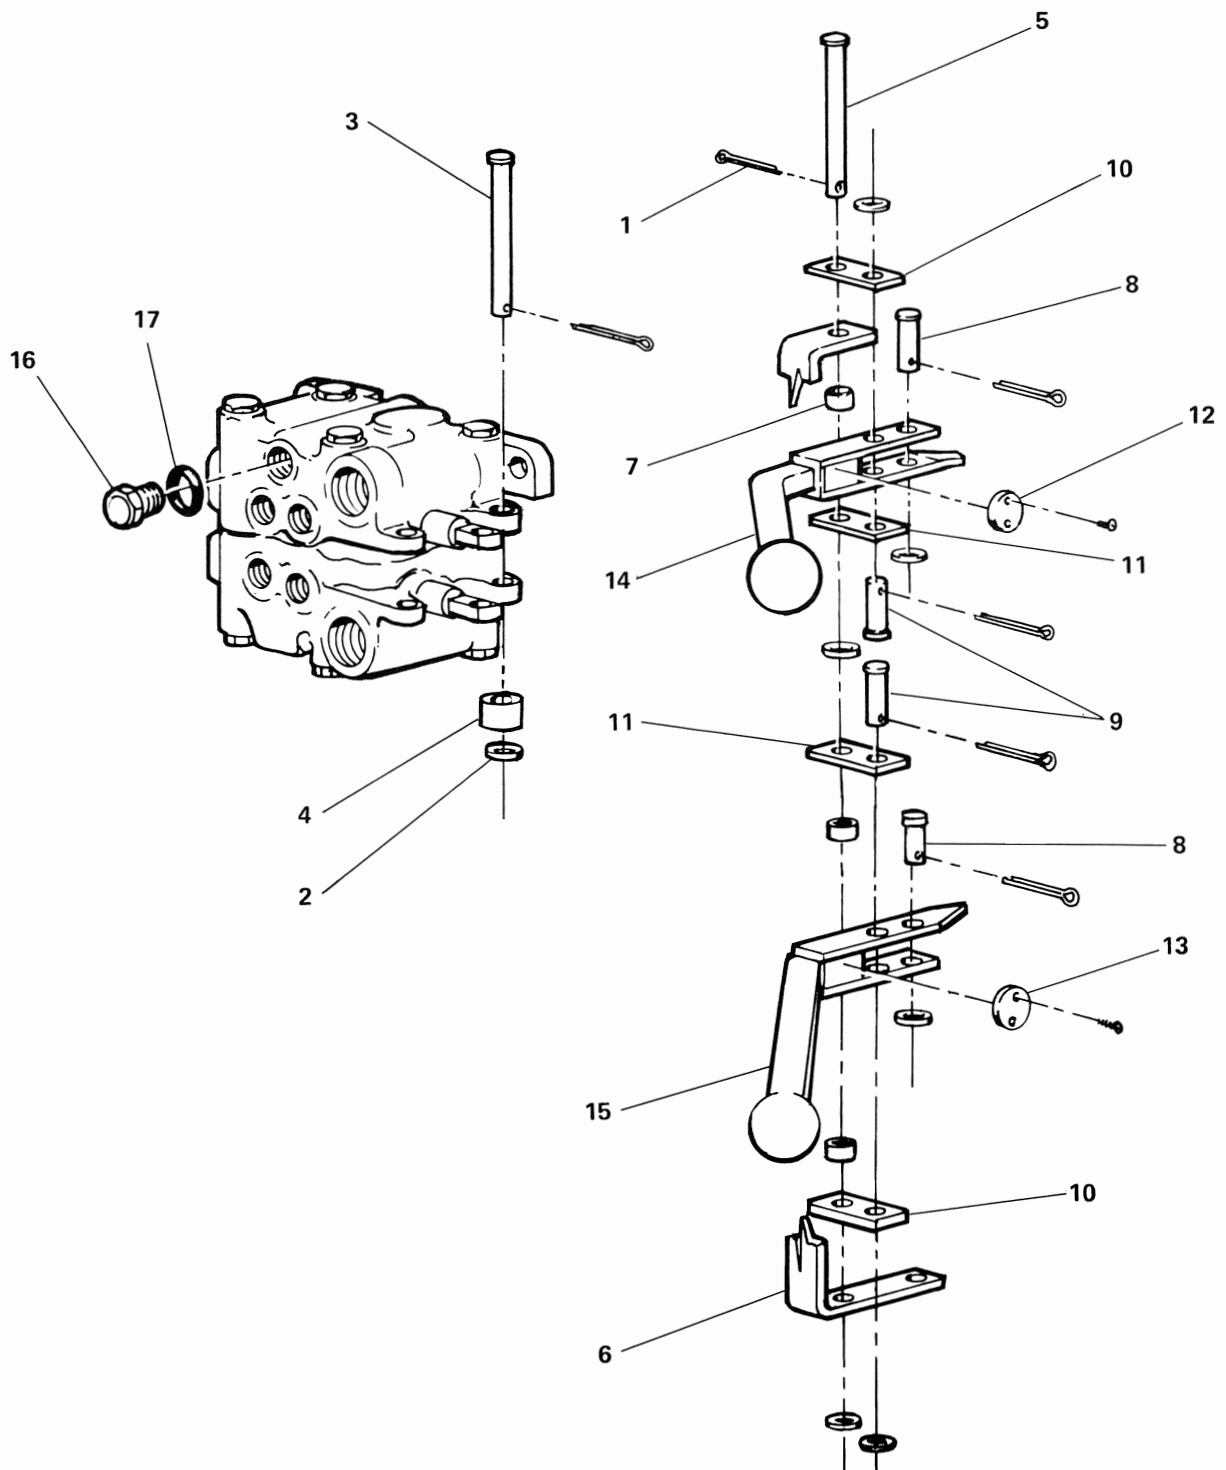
LH Direction Control Clamp Valve Assembly (Sheet 1 of 2)
